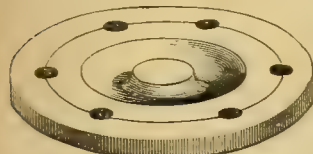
CYLINDER BOTTOM FINISHED OUTSIDE.
